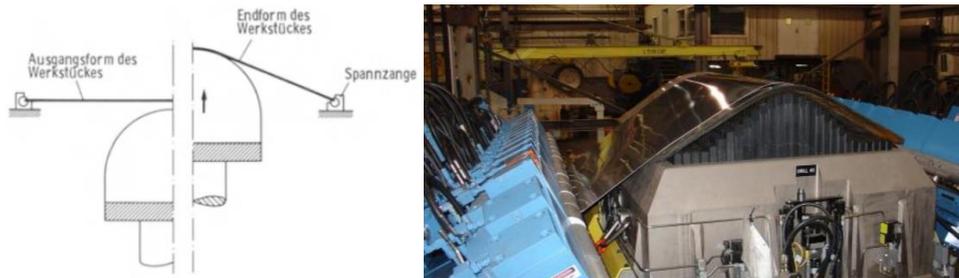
Tensile Forming techniques (König & Klocke, 1990)
